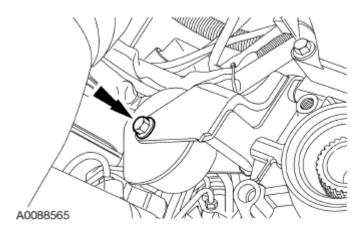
Locating Transaxle Rear Mount Bolt Courtesy of FORD MOTOR CO.
